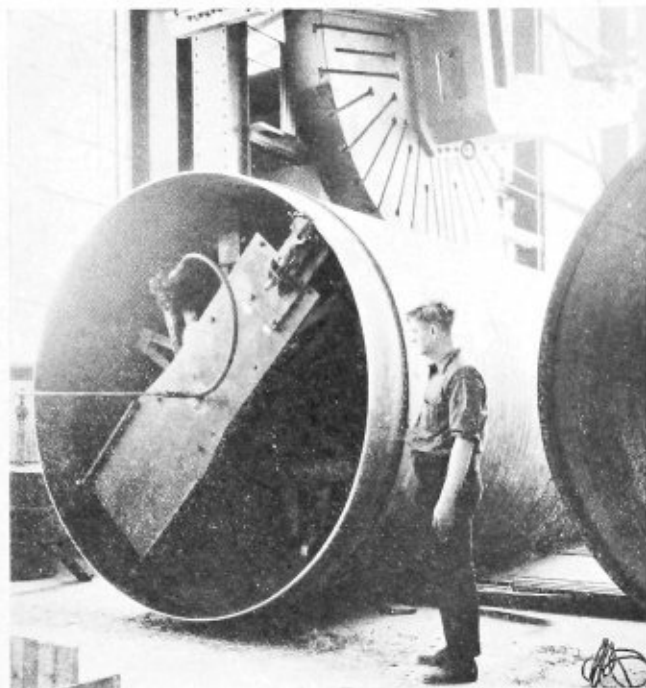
(Above) Machining the end of a pipe section. Fig. 7.—Assembling 8½-foot pipe sections
